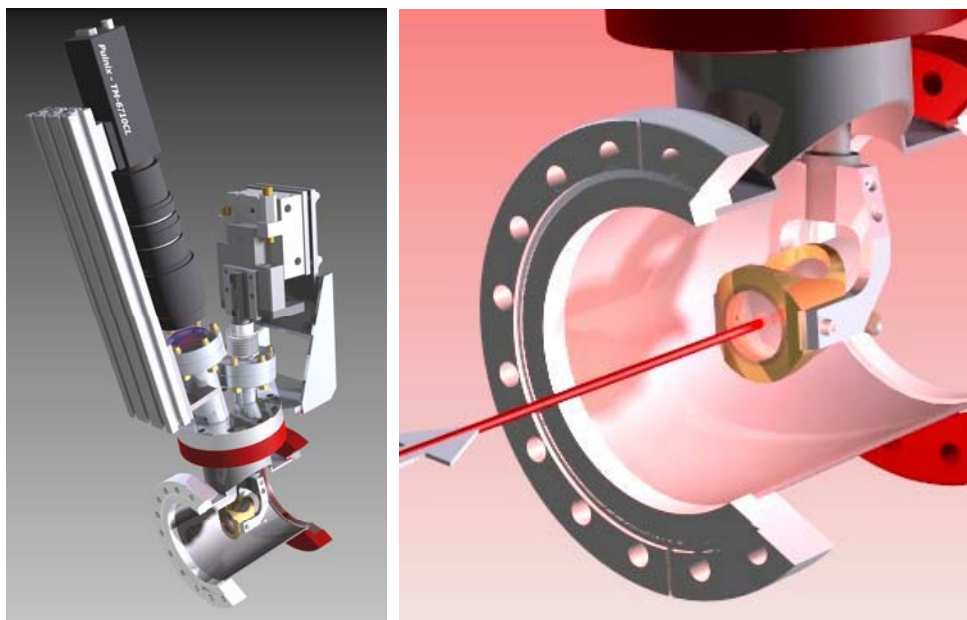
Conceptual design of the X-ray position/profile monitor. On the left is the full assembly with the imaging module with a CCD camera, and on the right is the scintillator screen. The sensor assembly can be moved in and out of the beam path.
